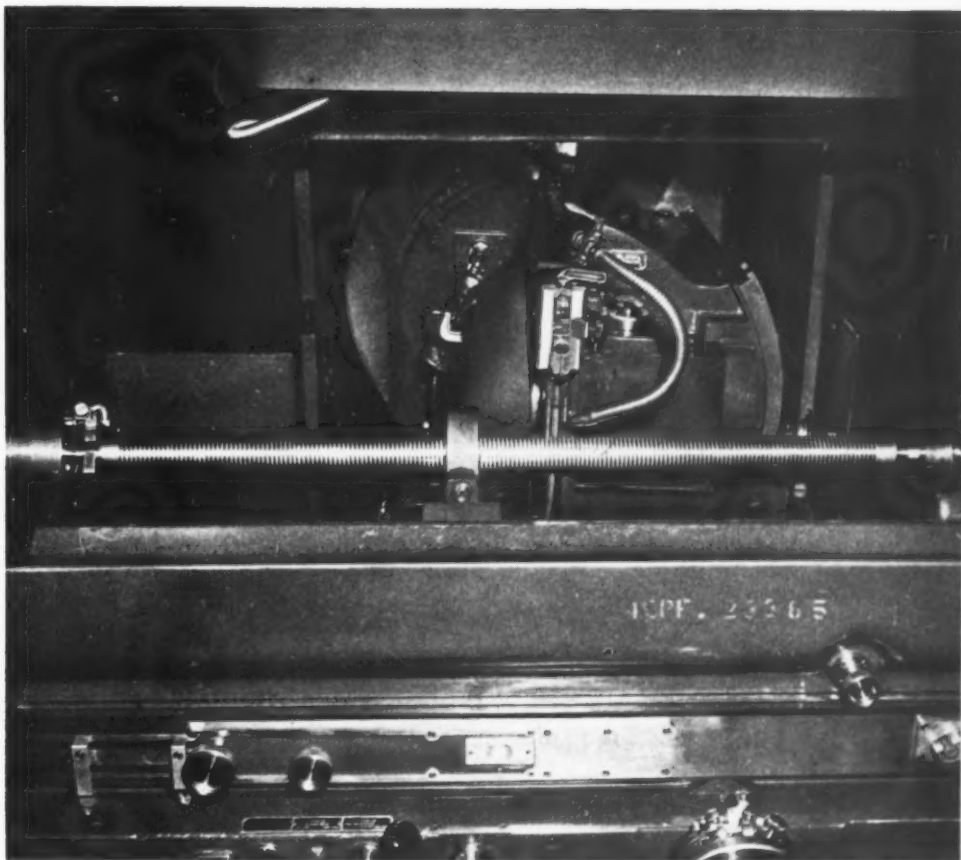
Grinding the Thread of a Flap Control Screw to a Lead Accuracy of 0.0005 Inch per Inch of Length
